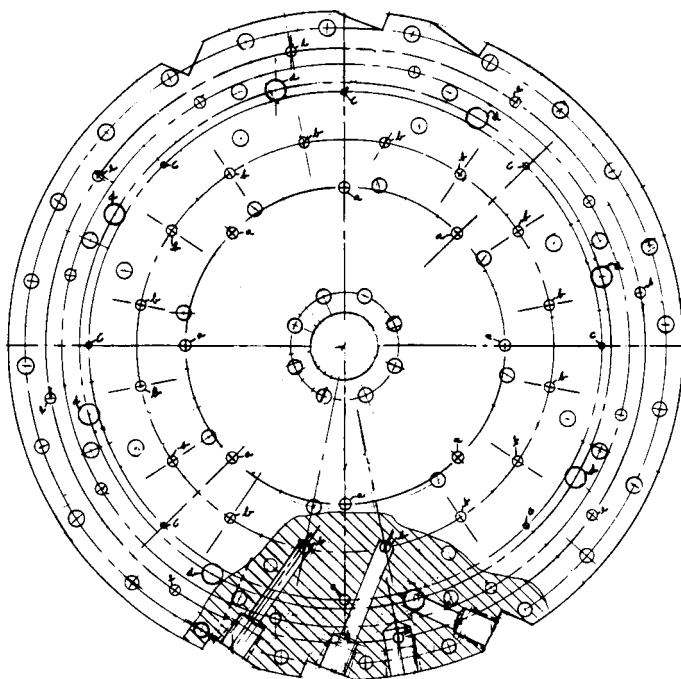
(a) POWER VALVE TEST PLATE, NPX-104-63, BOTTOM
